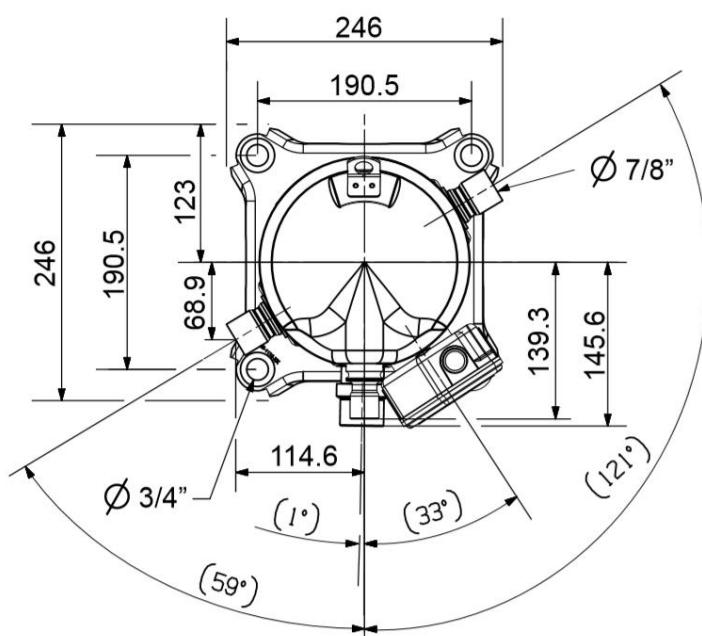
External dimensions of YPV066/096 compressors – Upper view
